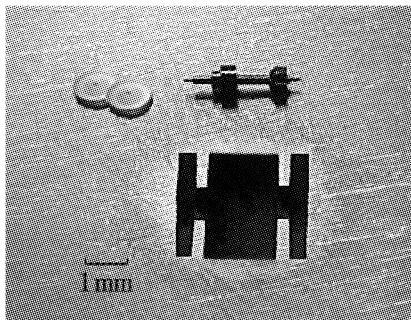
Micro-machined 2 mm-long shaft and retaining V-groove on baseplate
